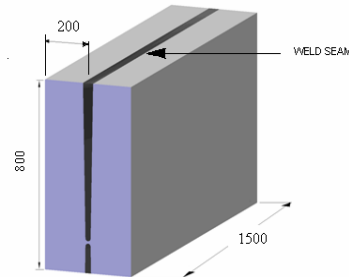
Schematic of 800 mm thick Narrow Gap Weld
